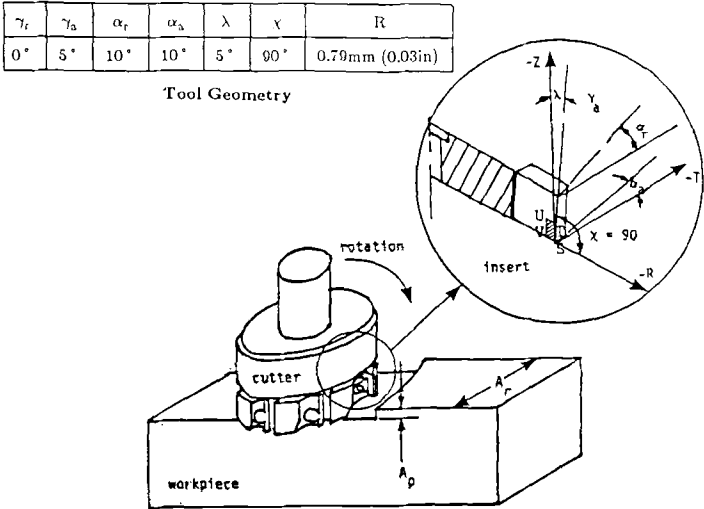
Flycutting with a single tooth of a multi-tooth cutter.
